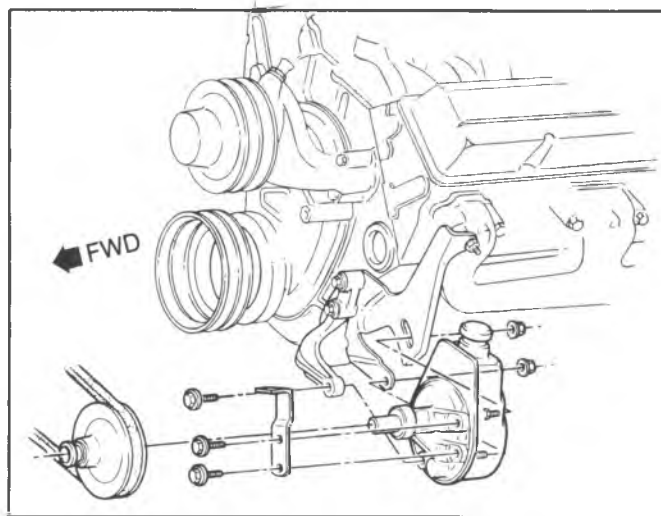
B3-22--P/S Pump Mounting; G100, G200, G300
